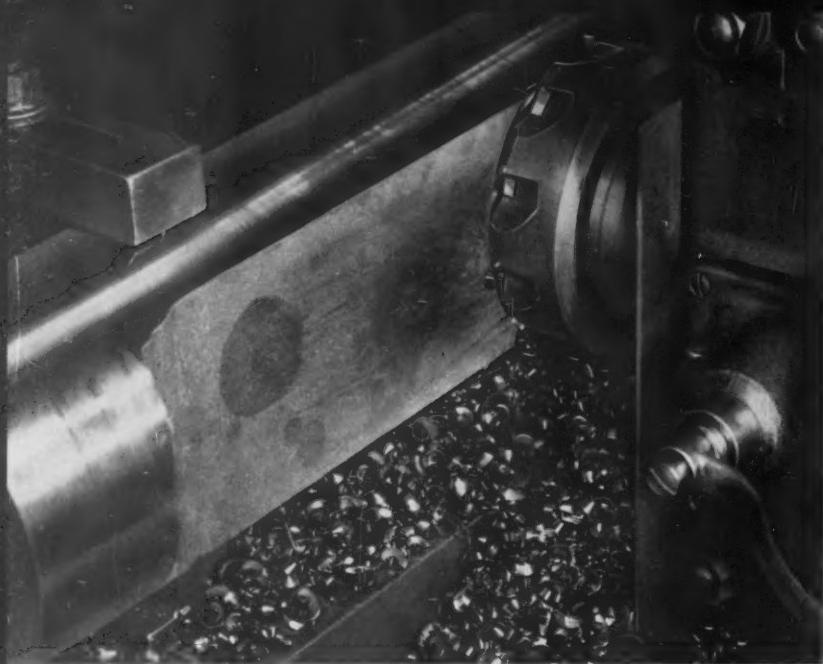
Face-milling cutter with inserted carbide blades machining flats on an alloy-steel forging. A cutter speed of 250 surface feet per minute, with a feed of 6 inches per minute, is used.
